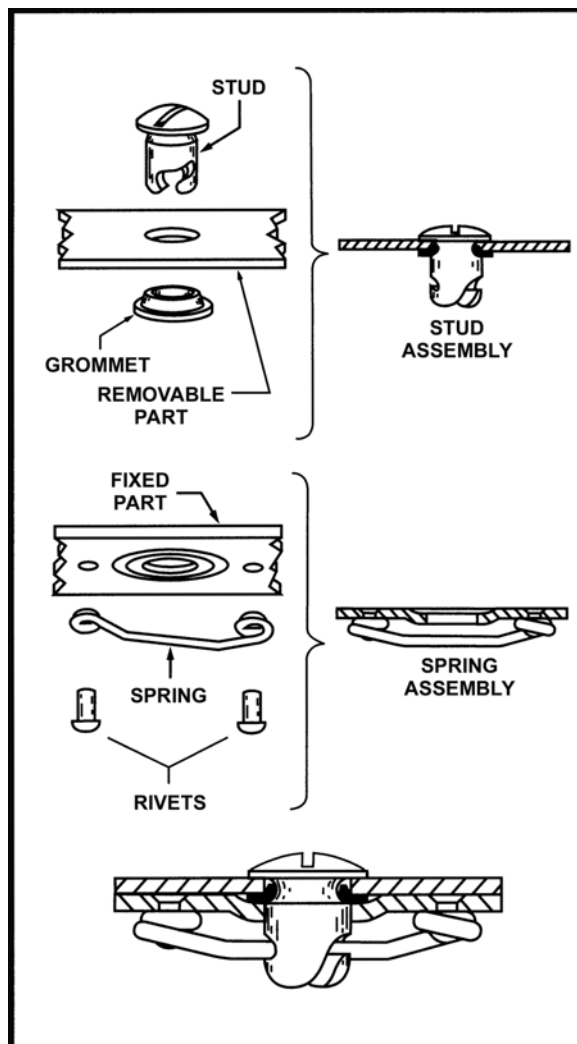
, With a standard Dzus fastener, a slotted stud engages a spring mounted to the fuselage. As the stud is turned onequarter turn, the spring locks the fastener in place.
